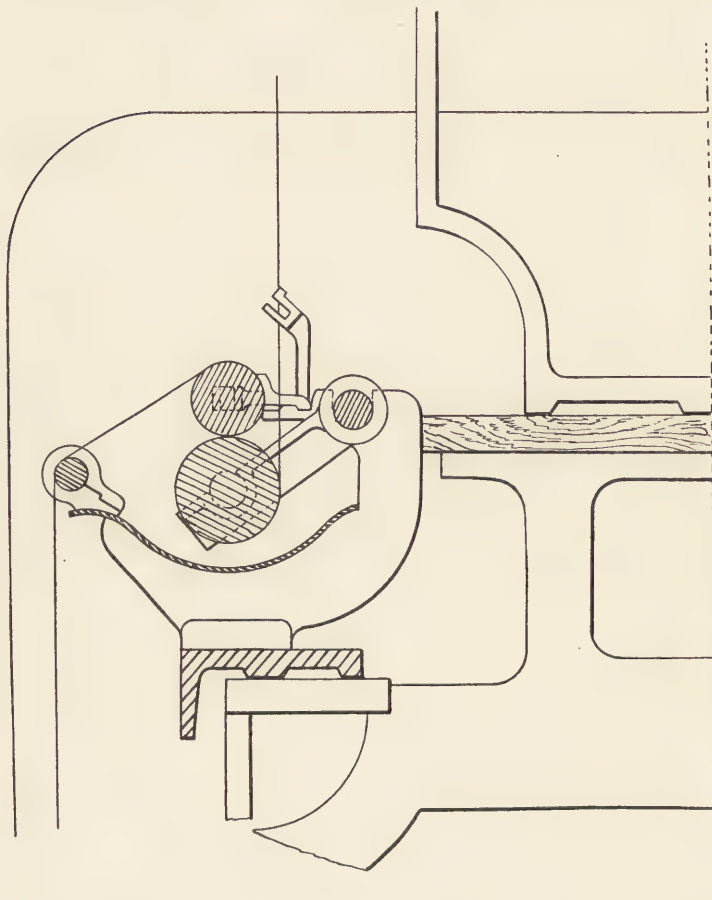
SECTION OF DOUBLER SHOWING THE SCOTCH SYSTEM OF DOUBLING.
